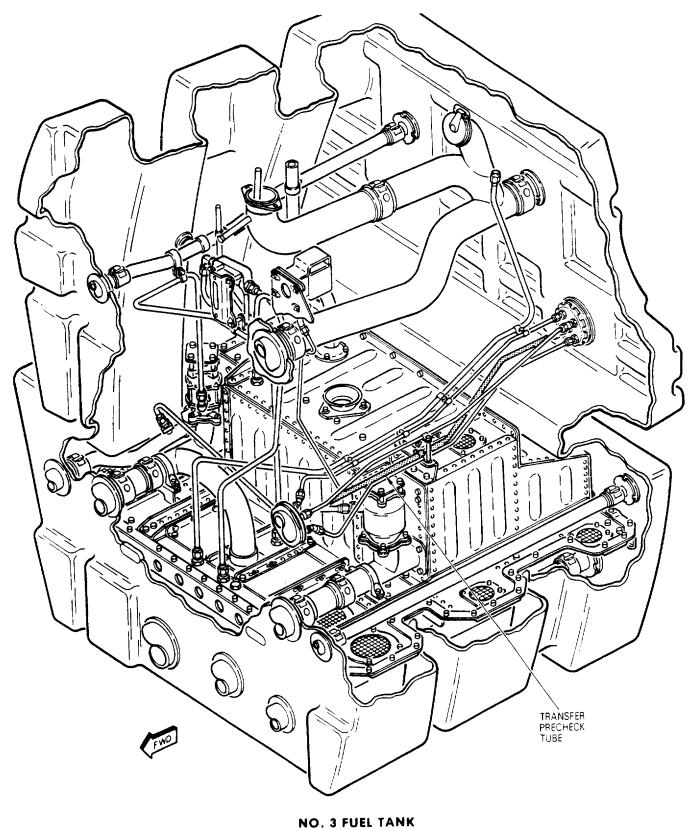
No. 4 Fuel Tank Transfer Test Troubleshooting Component Locator (Sheet 2)
